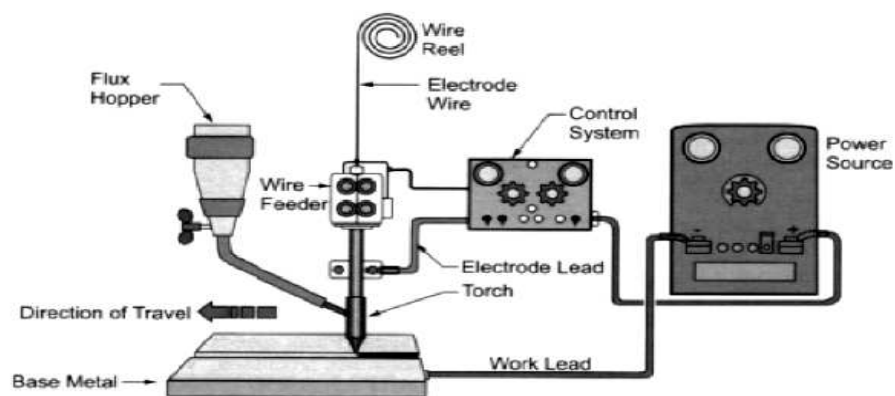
Equipment set up for single wire submerged arc welding
